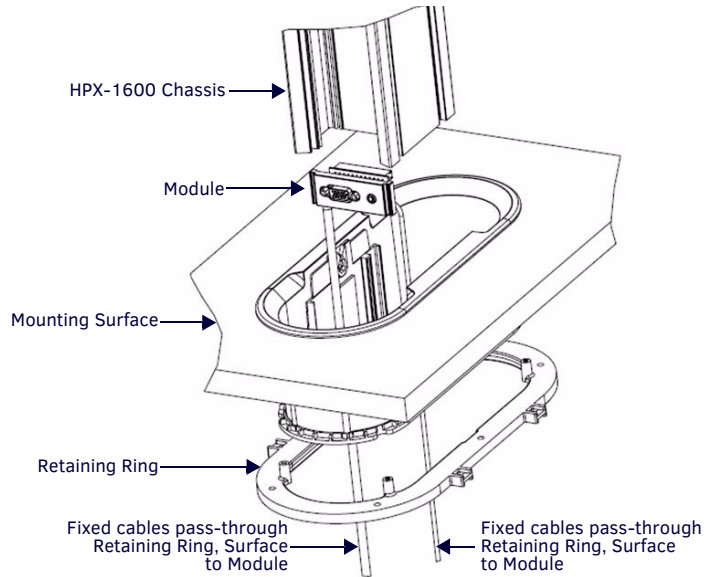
FIXED CABLE PASSING THROUGH RING, TABLE AND INTO THE HPX-1600 CHASSIS
